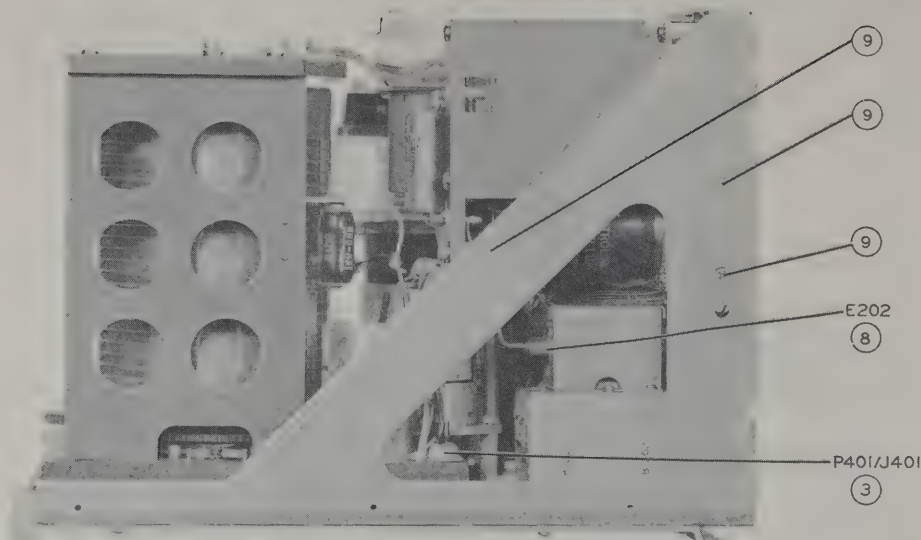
Main Chassis, Left Side View, Subassembly Removal Points
